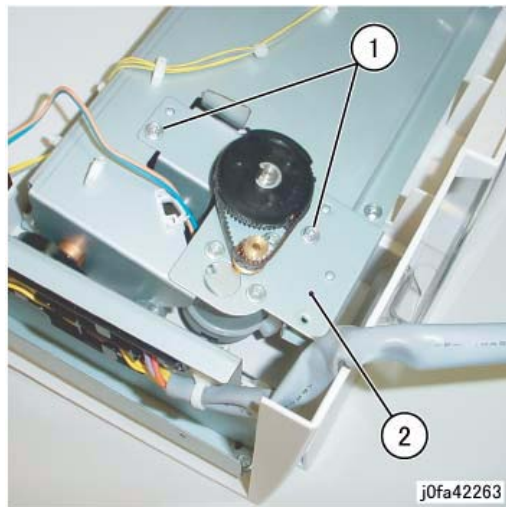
Removing the Stacker Motor Assembly (j0fa42263)
